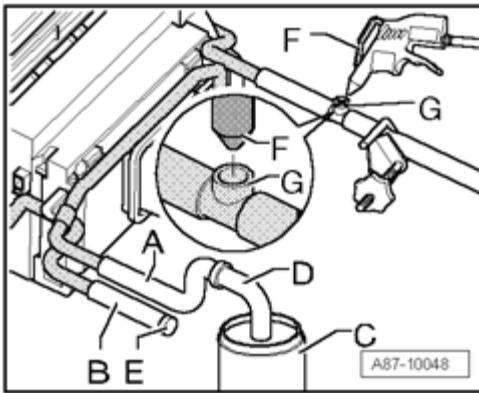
Identifying Hose Section, Coolant Hose, Plug, Vessel, Extension Hose, Bleeder Valve, And Heater Core
